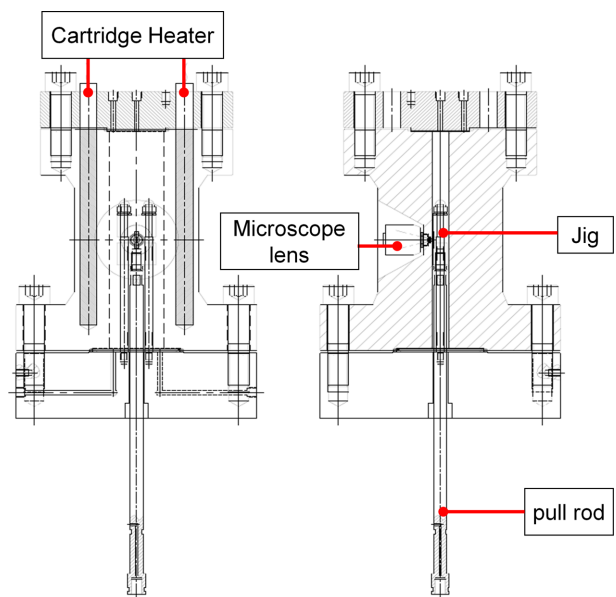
Drawing of autoclave, specimen jig and pull rod for SSRT
